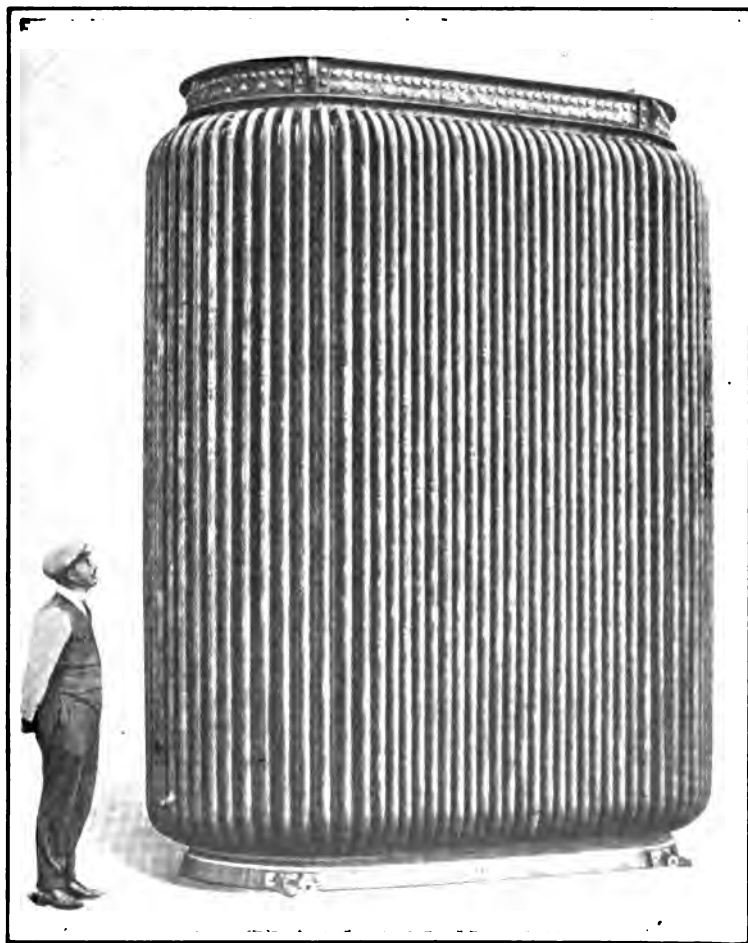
Tubular Transformer Tank, showing Tubes expanded preparatory to Welding
